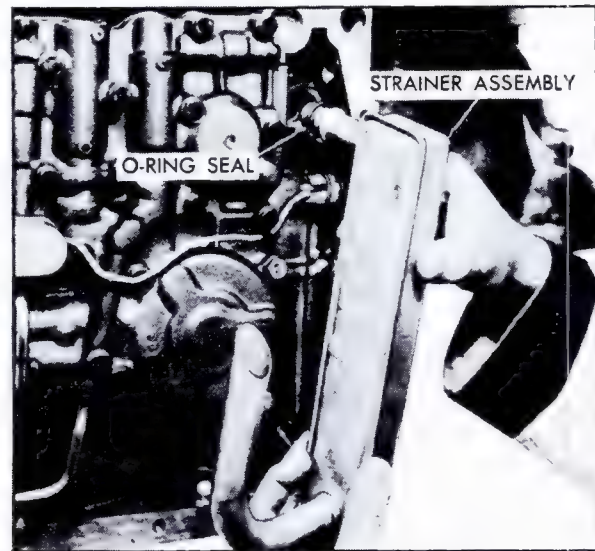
Removing Intake Pipe and Strainer Assembly
